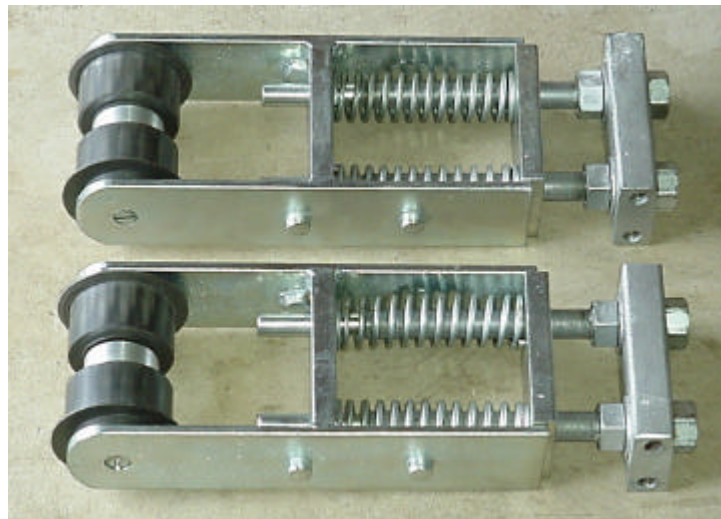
Assembled view of the complete front sliding axle unit and tensioning mechanism (ready to be installed in between TMSP)
